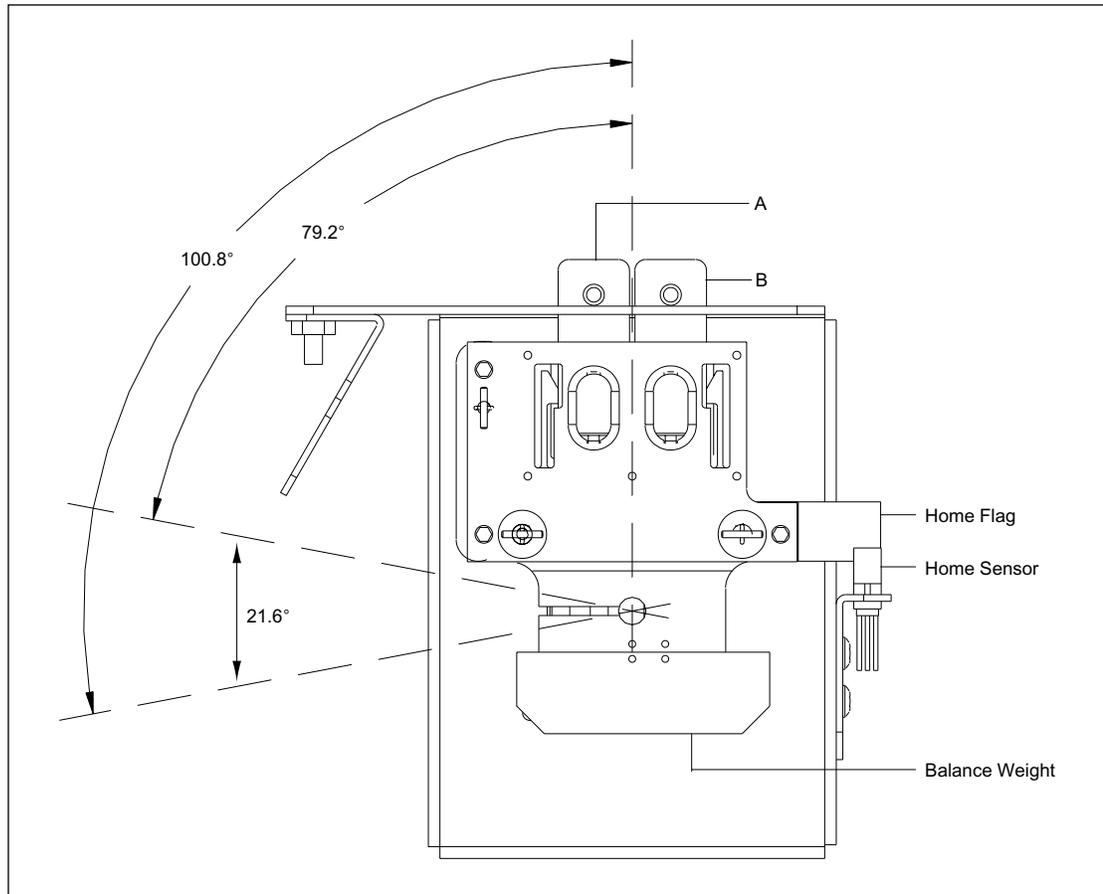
Secondary Beamsplitter Arm Assembly.
